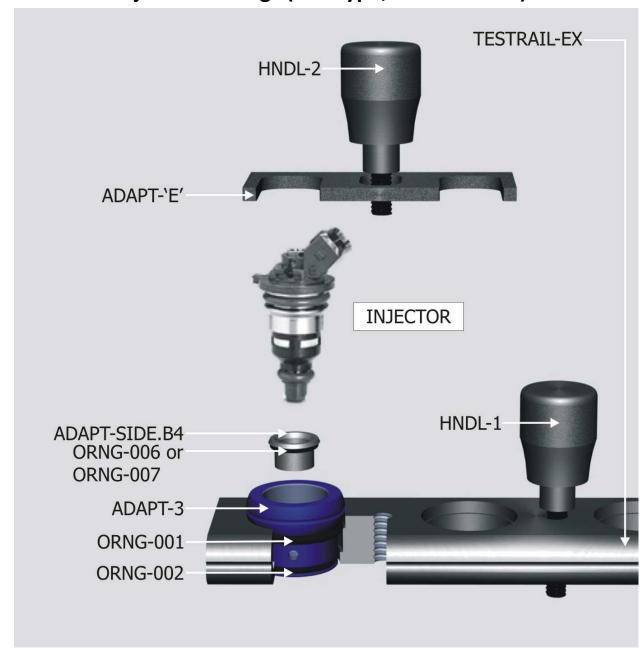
xi, Side-Feed Type (B) Fitting Illustration (1)
